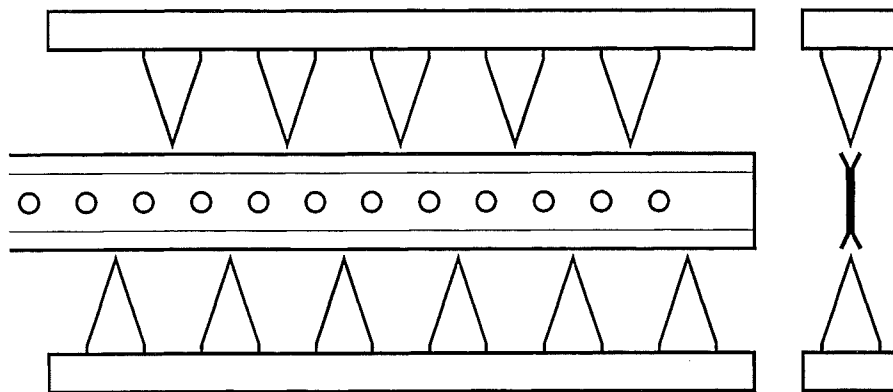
Schematic representation of the tool used for destructively testing the welded strips.
